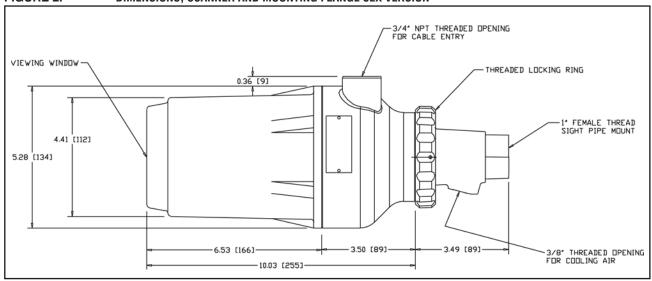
DIMENSIONS, SCANNER AND MOUNTING FLANGE CEX VERSION
